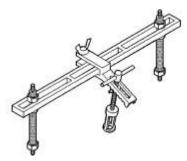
CRANKSHAFT LOCKING TOOL - VM.9992 Courtesy of CHRYSLER LLC
